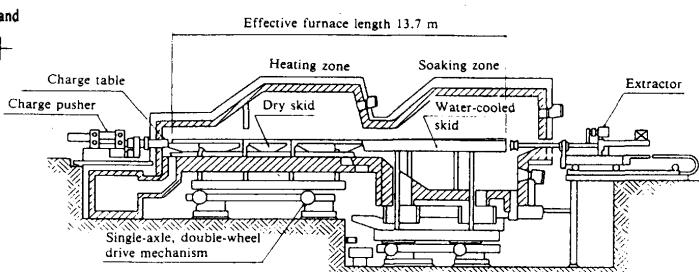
Cross-sectional view of billet reheating furnace at Kamaishi wire rod mill
